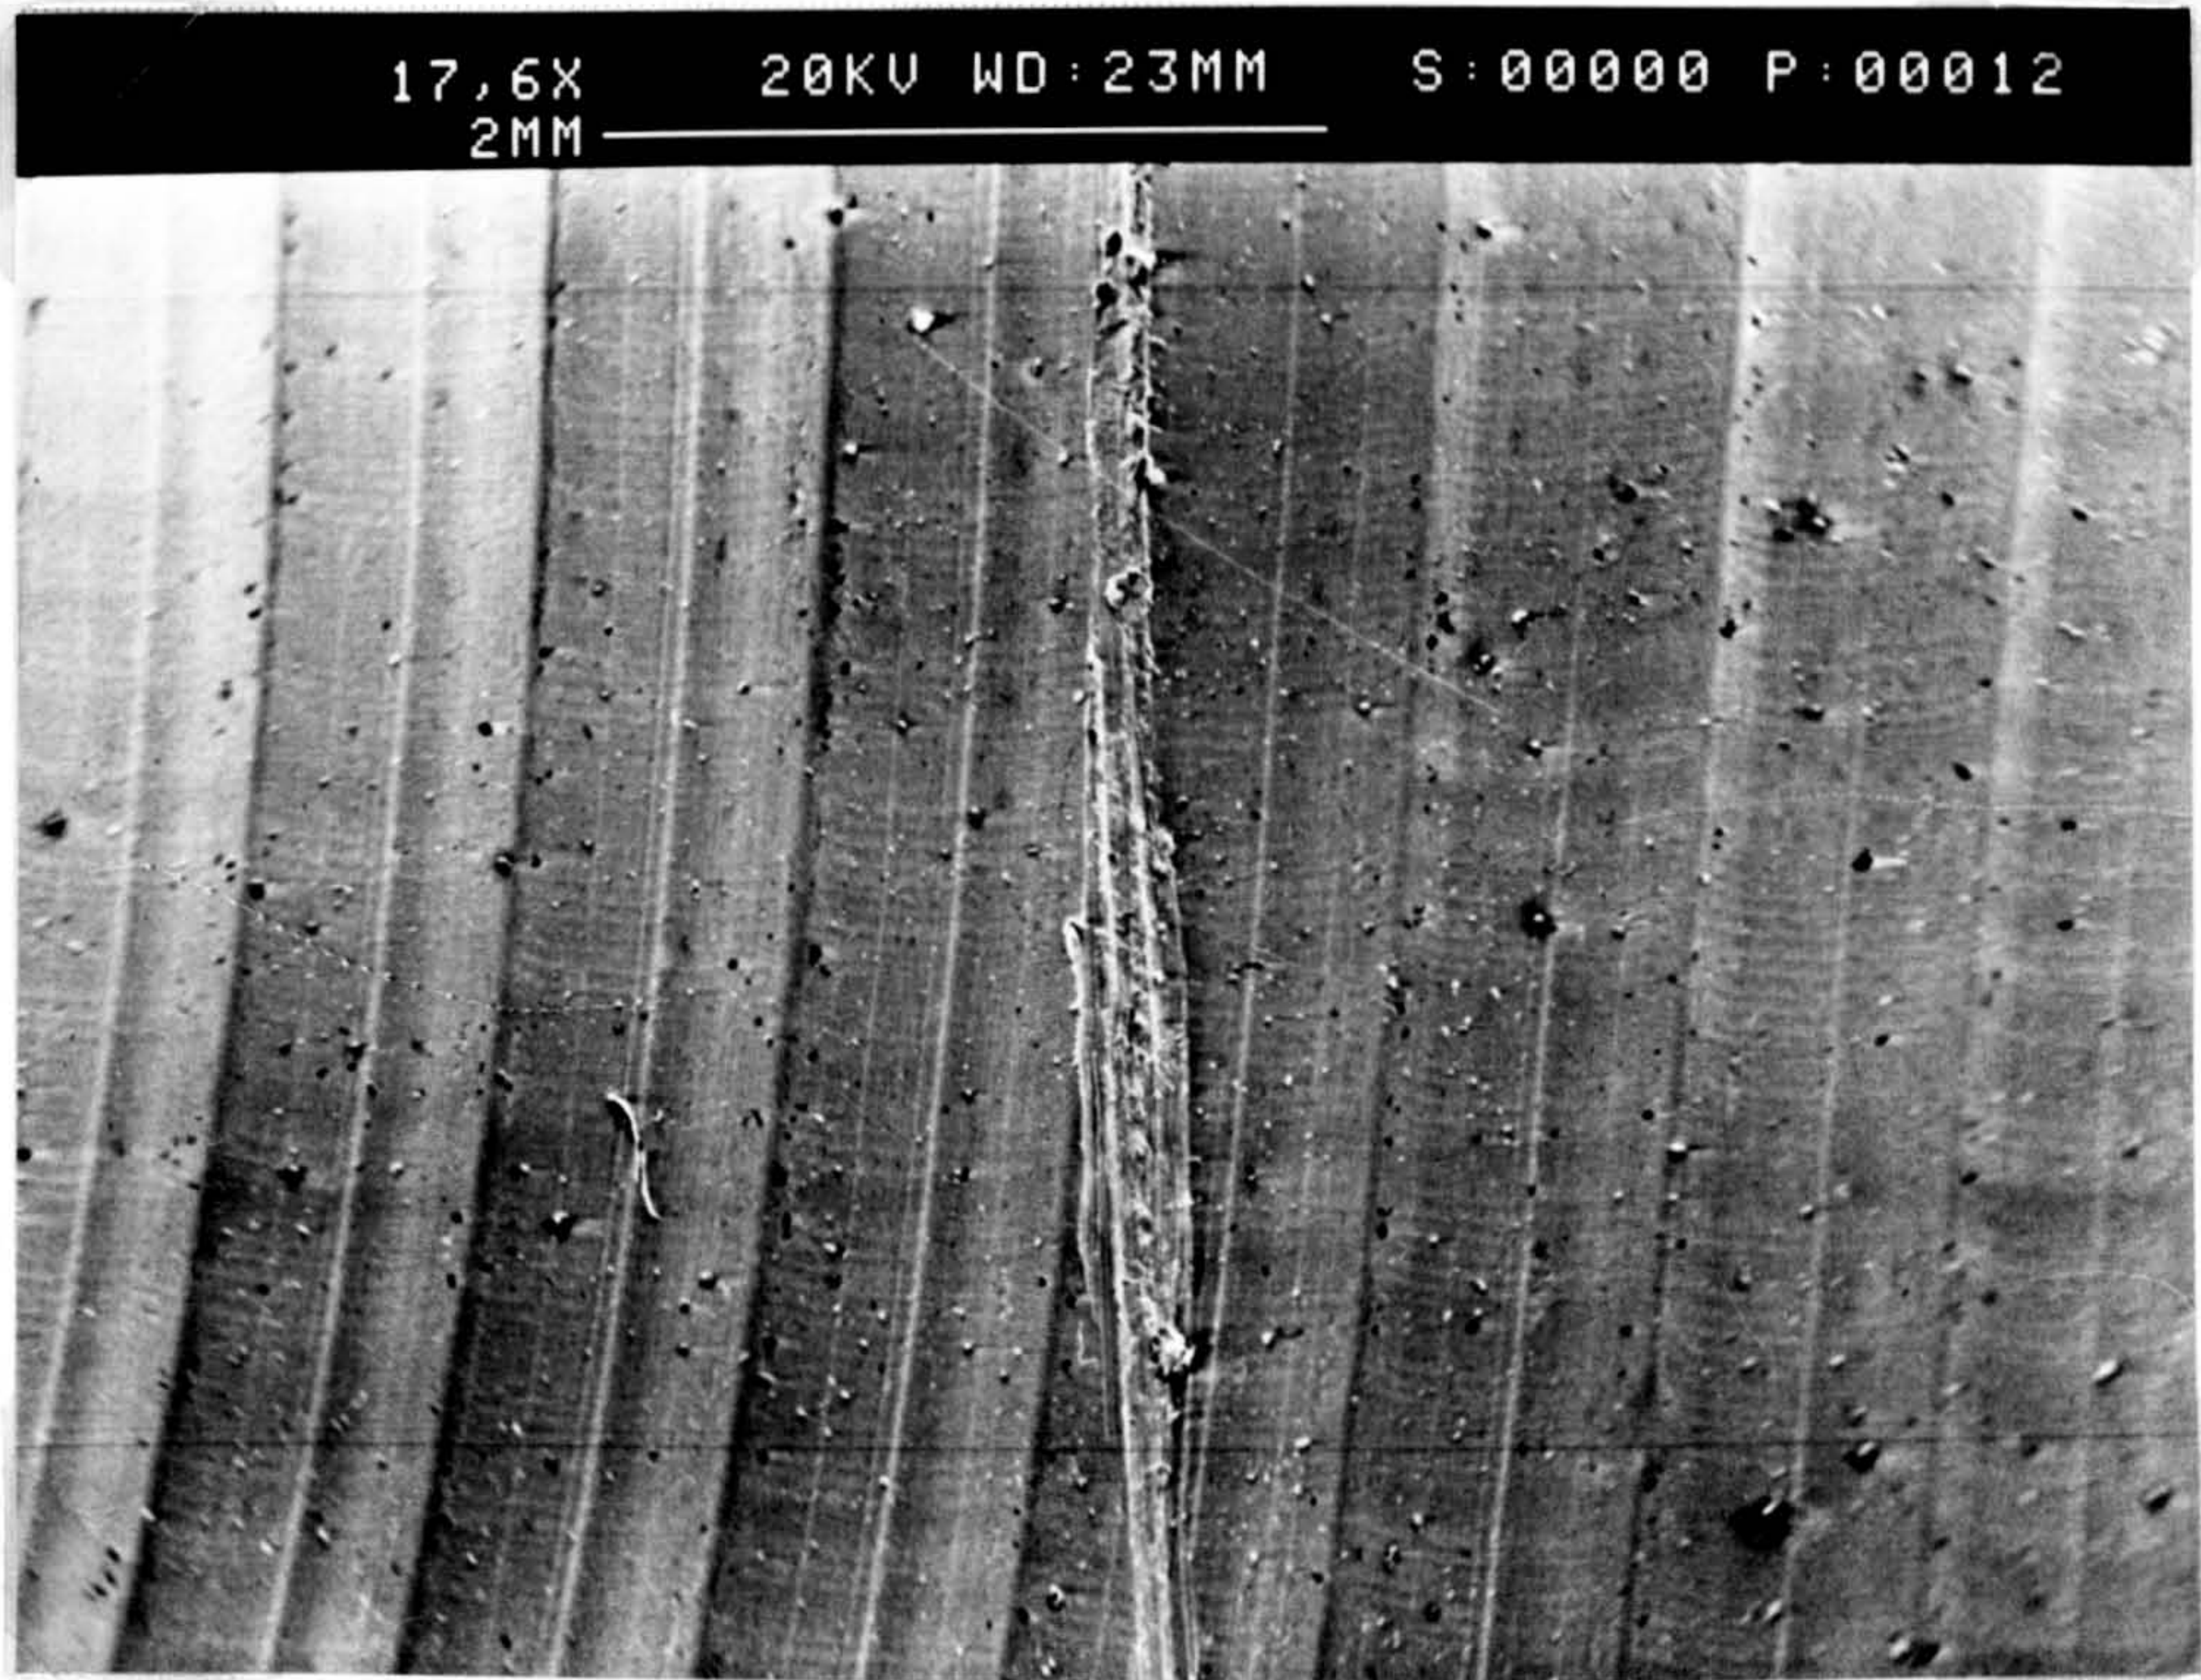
12.5 μm end mill sample with scratch defect, surface photograph
